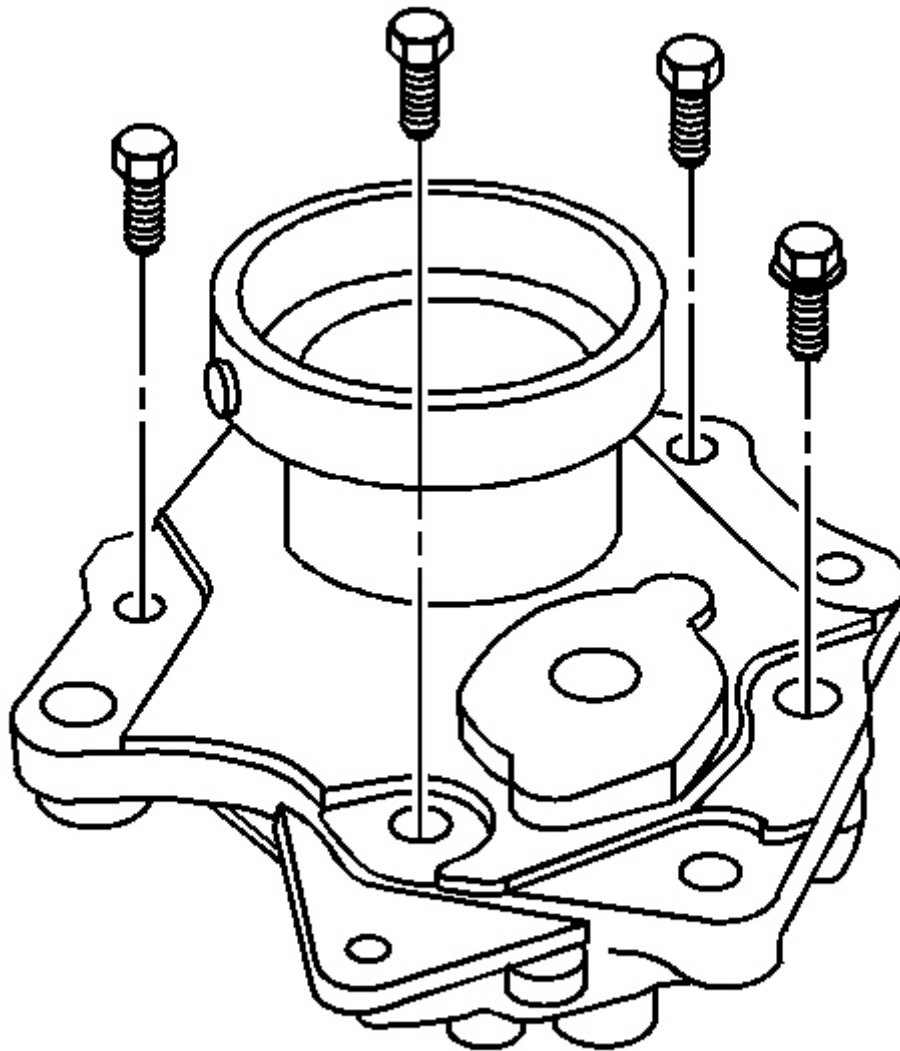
View Of Intermediate Shaft Bearing Assembly Bolts
